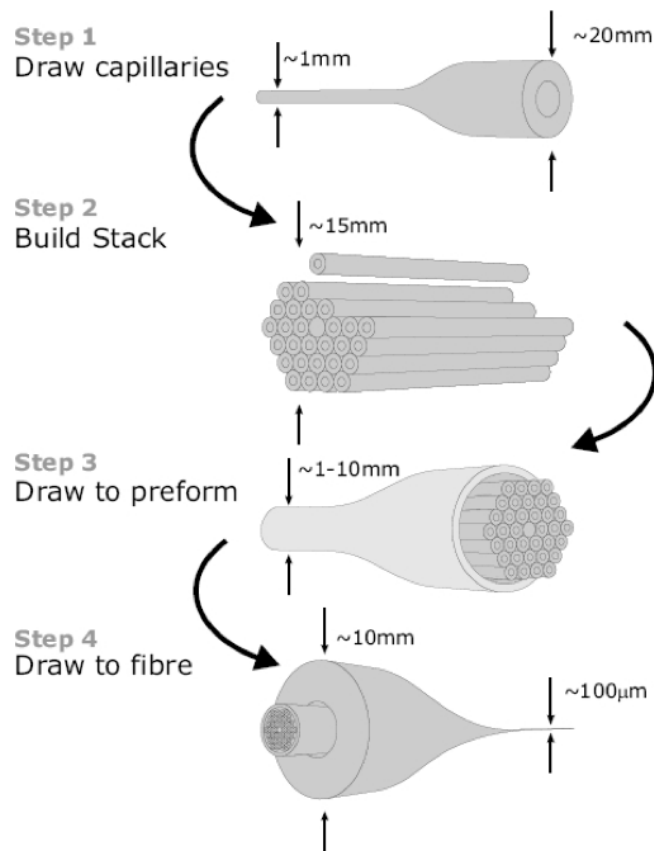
The stack-and-draw method for fabricating fibre, from [117].
